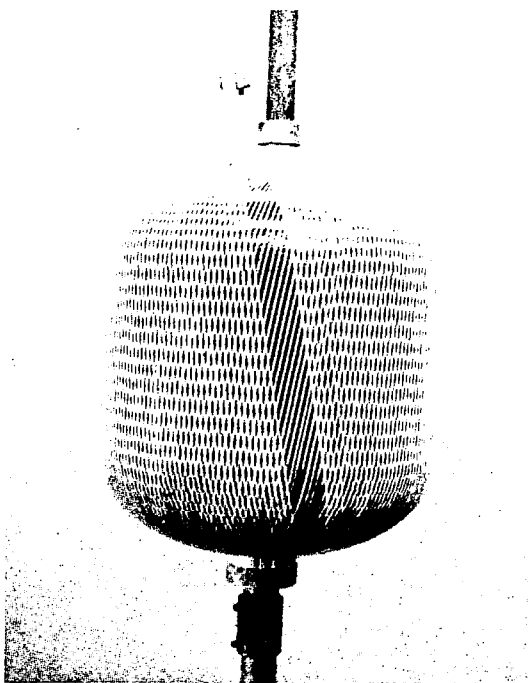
Front View Just Before Mandrel has Completed a 360-deg Rotation
